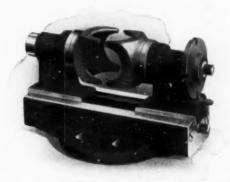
FIG. D. AUTOMATIC CHUCK USED ON TURRET LATHE.
